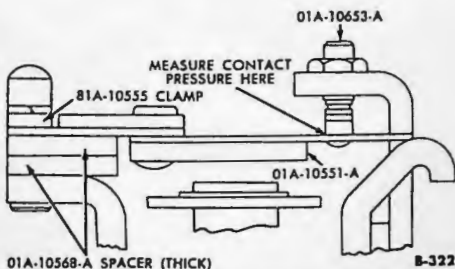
Latest Type Current Limiter and Contact Screw Properly Installed.
